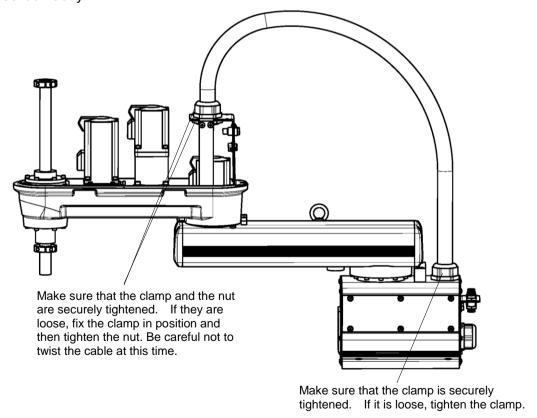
Cable clamp inspection locations (KHL-500, KHL-600, KHL-700)
